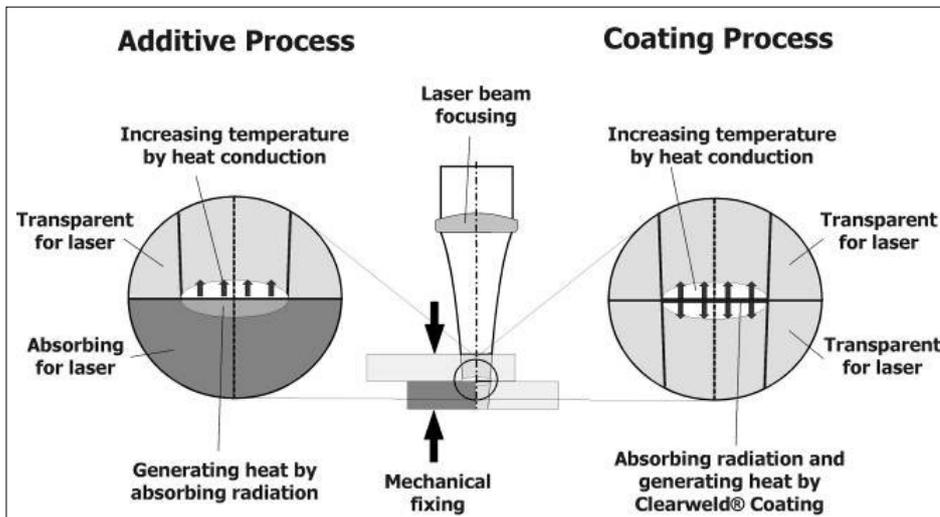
Laser welding plastics using Clearweld additive or Clearweld coating
